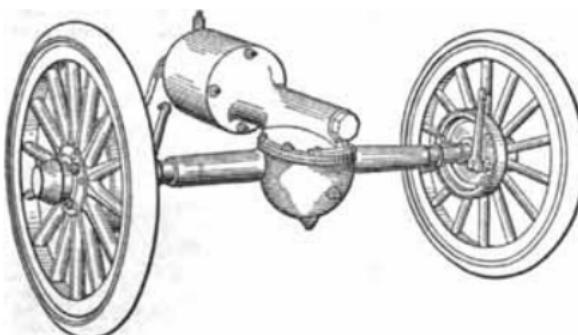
Rear axle assembly, spiral gear drive. (Commercial Truck Company.)
